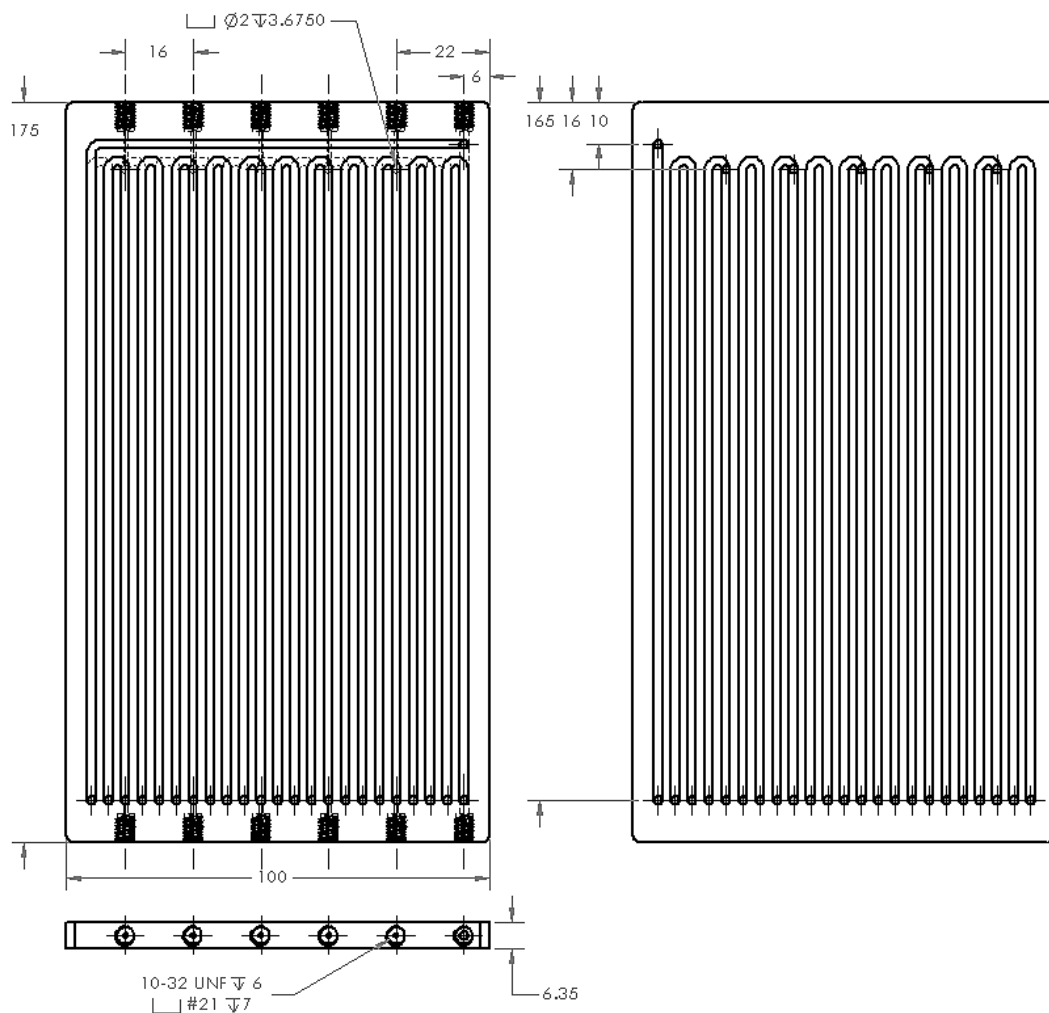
Engineering drawing of Oscillating Heat Pipe
